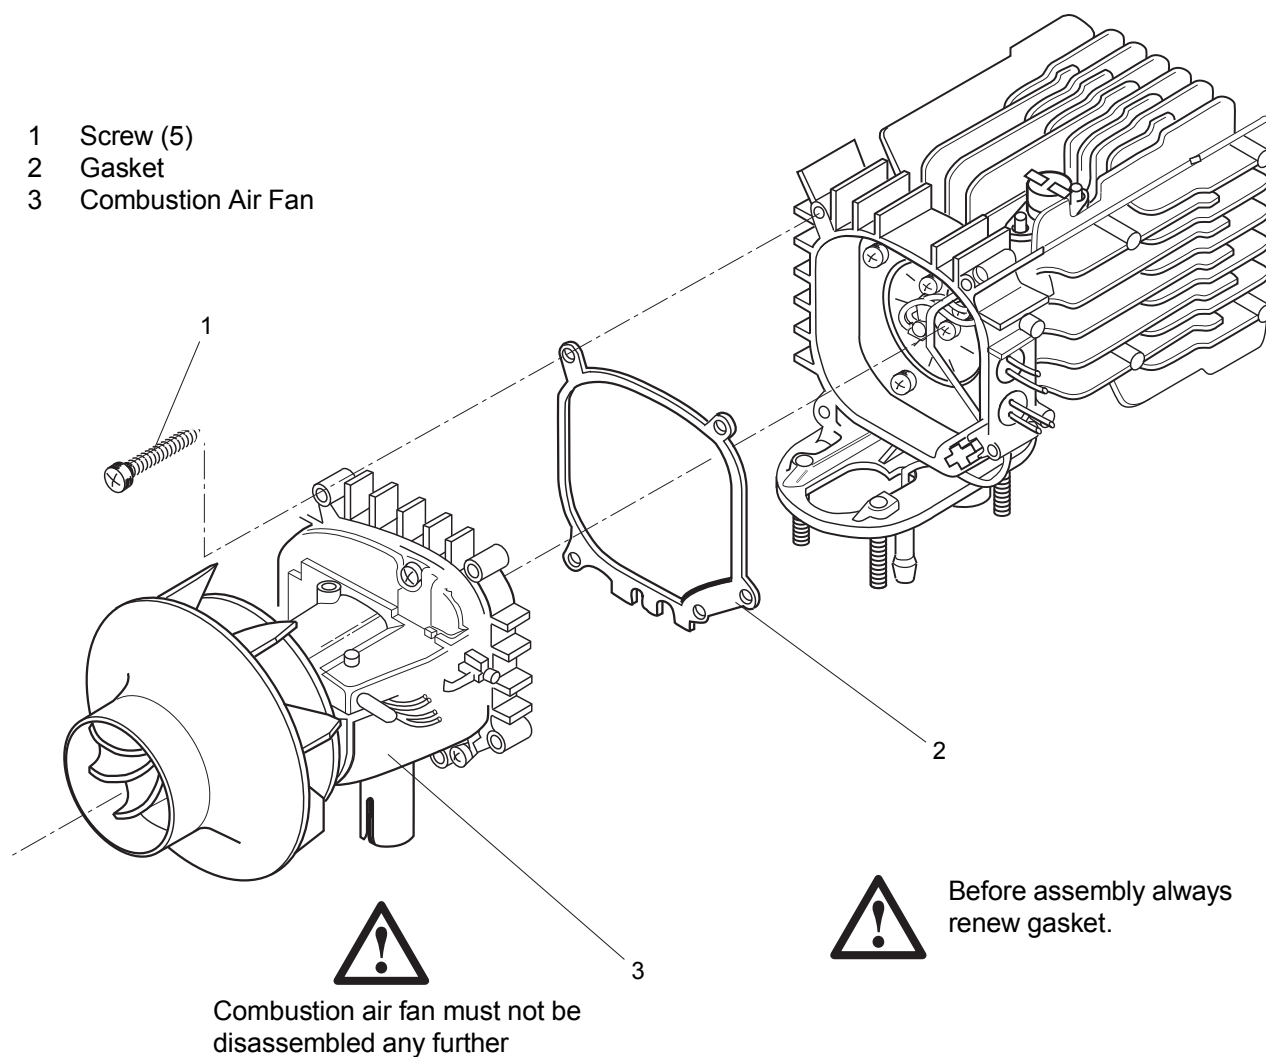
Replacement of Combustion Air Fan (Assembly)
